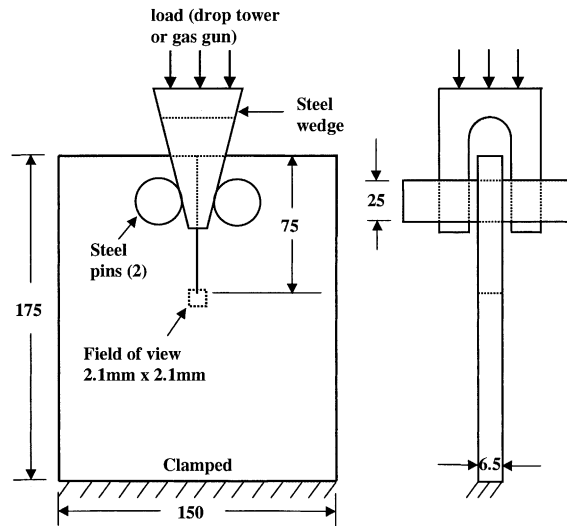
A schematic illustration of the specimen geometry and loading arrangement for HY100 specimens. All dimensions shown are in millimeters.
